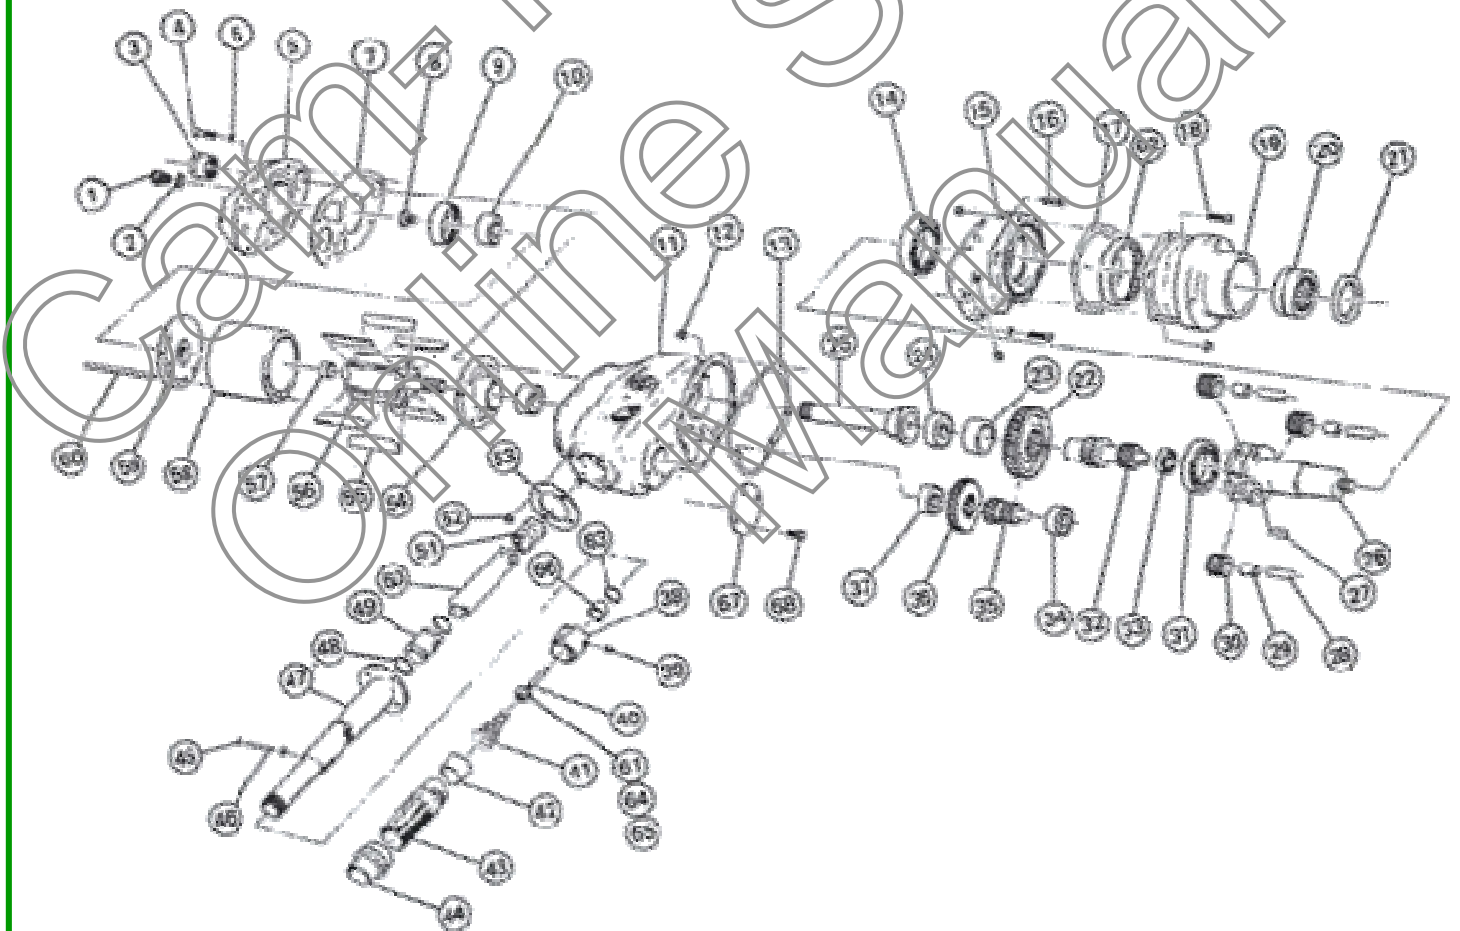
Air Motor (Chicago Pneumatic)
